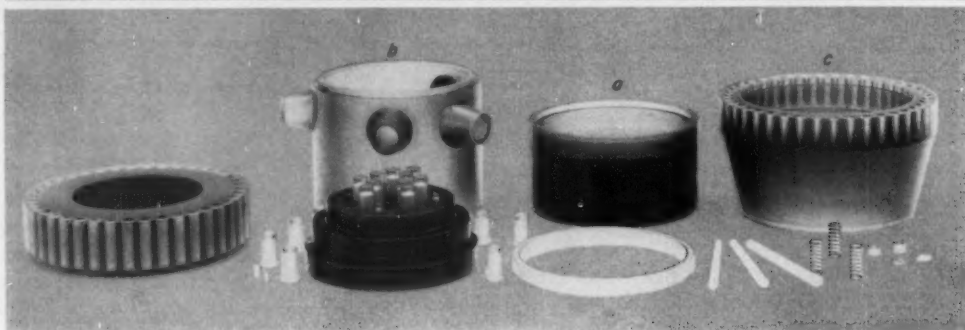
Photoelastic model of a pressure vessel before assembly. Parts *a*, *b*, and *c* were machined from epoxy resin. Cores taken from the solid castings were used to form various small parts of the assembly. Epoxies are excellent model materials because of their high figure-of-merit values.
